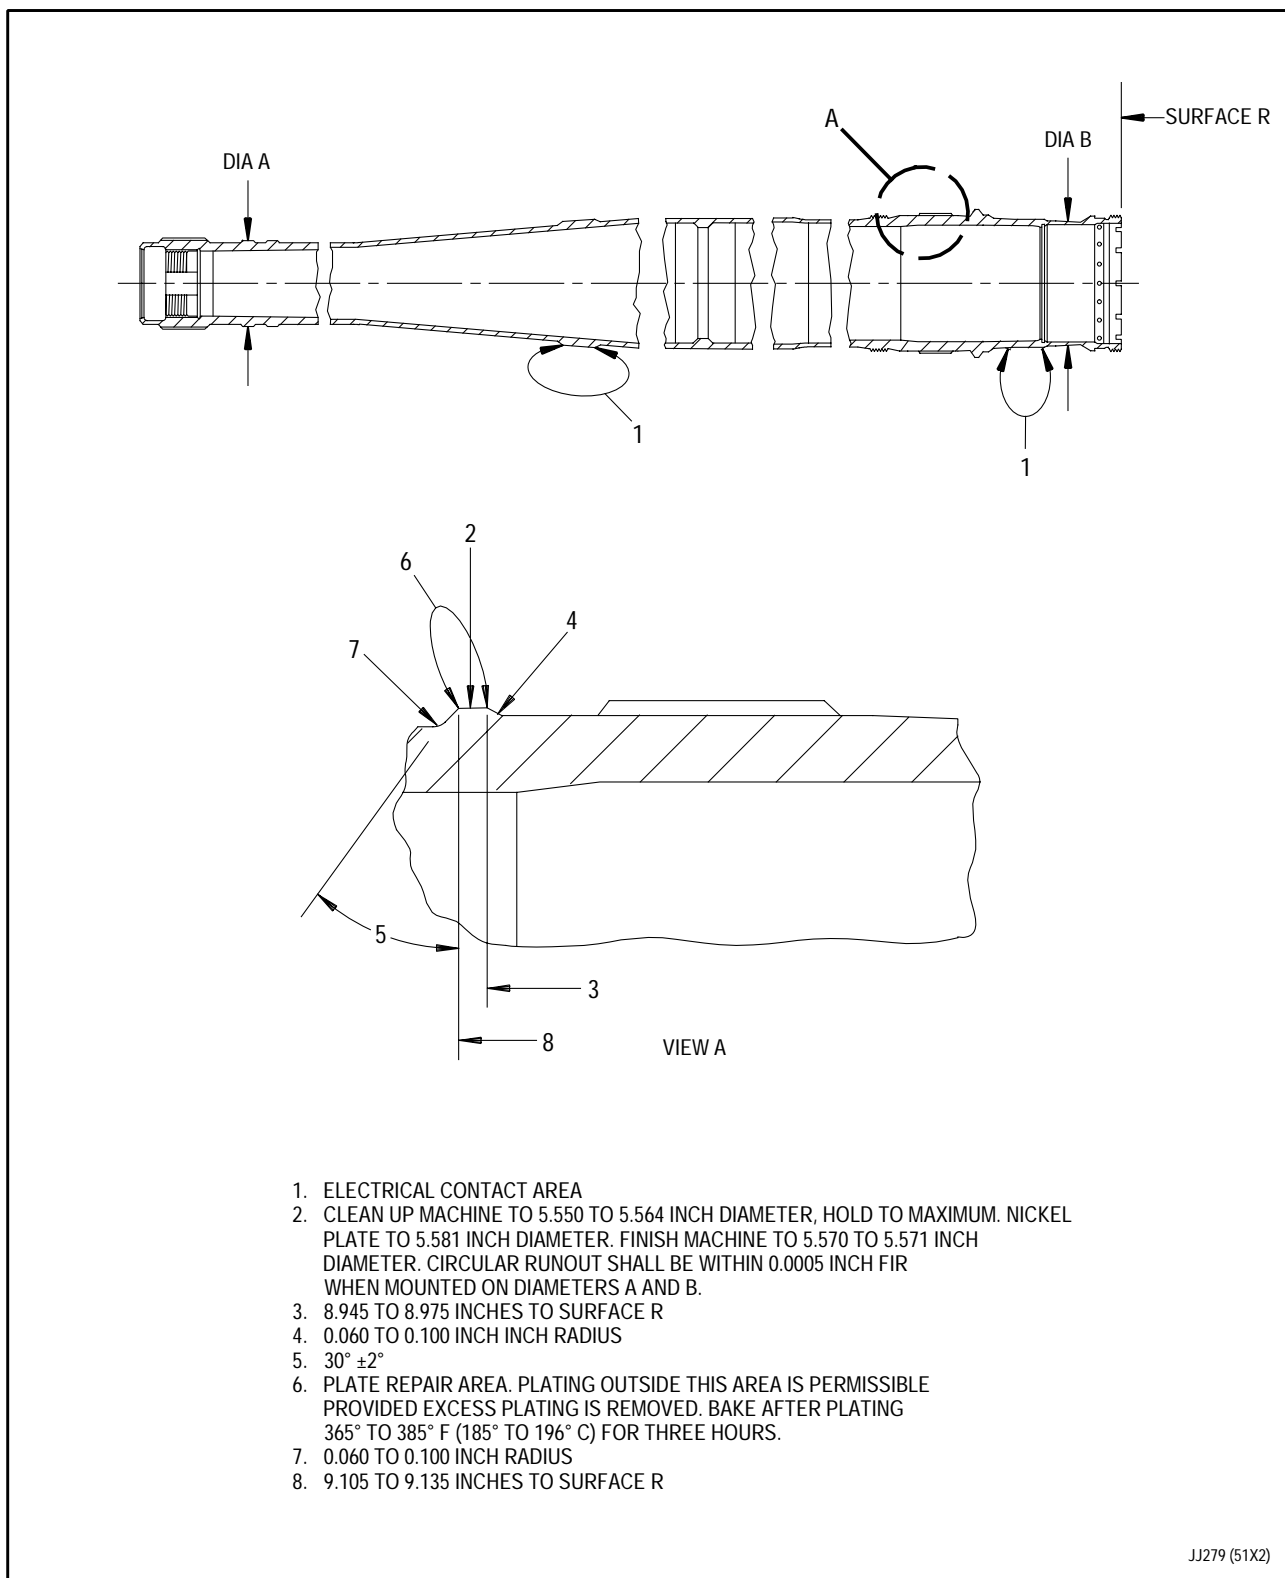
Front Compressor Drive Turbine Shaft - Rear Turbine Hub Forward Snap Diameter Repair
